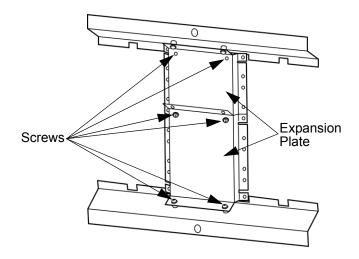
Assemble Stand Mount with Screws (CHS1U-US+CHS2U-USx2 Configuration)
